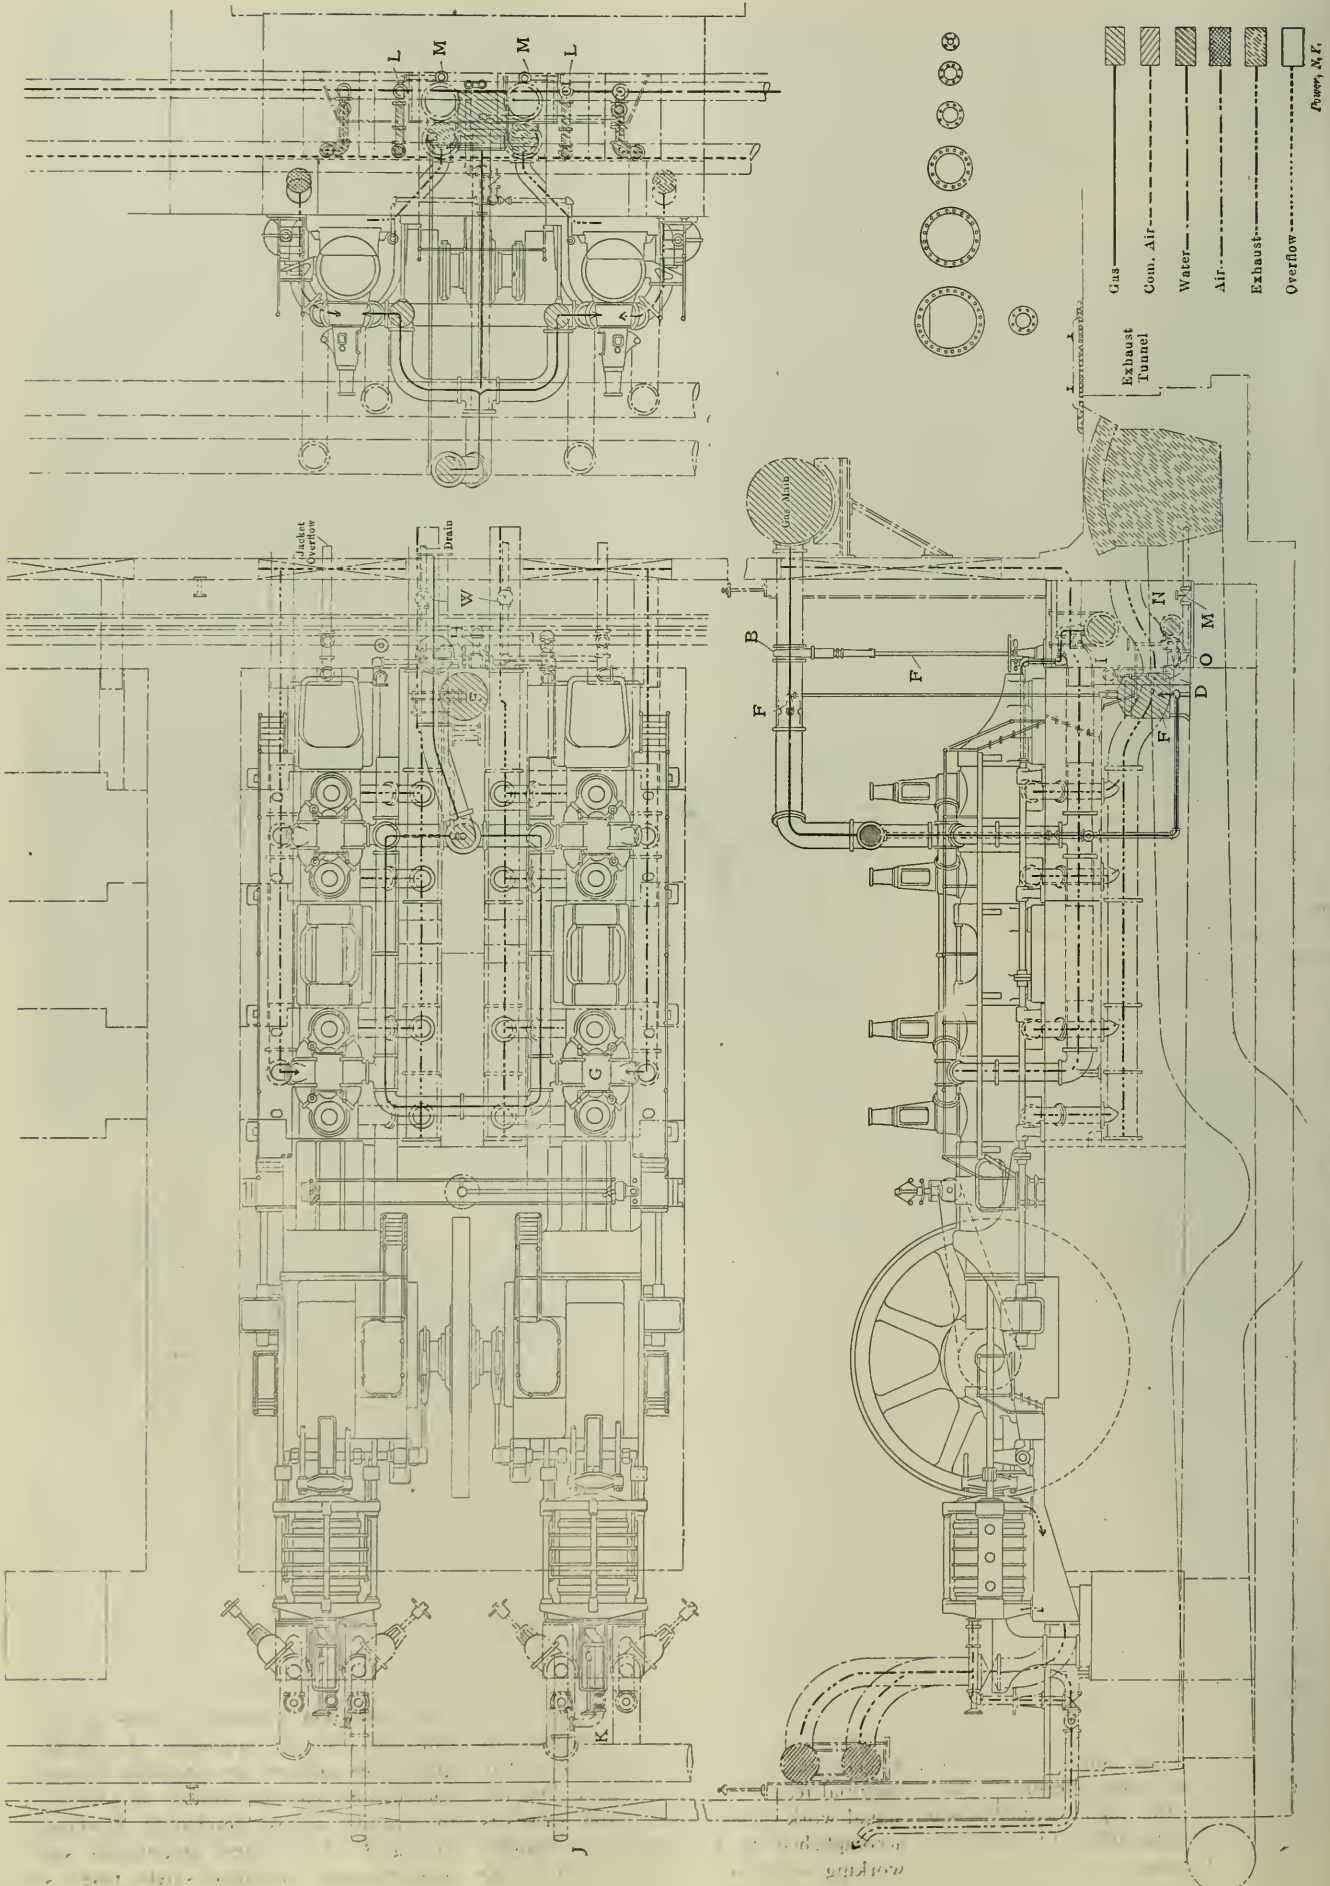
GENERAL PLAN AND ELEVATION OF COMPLETE BLOWING UNIT
